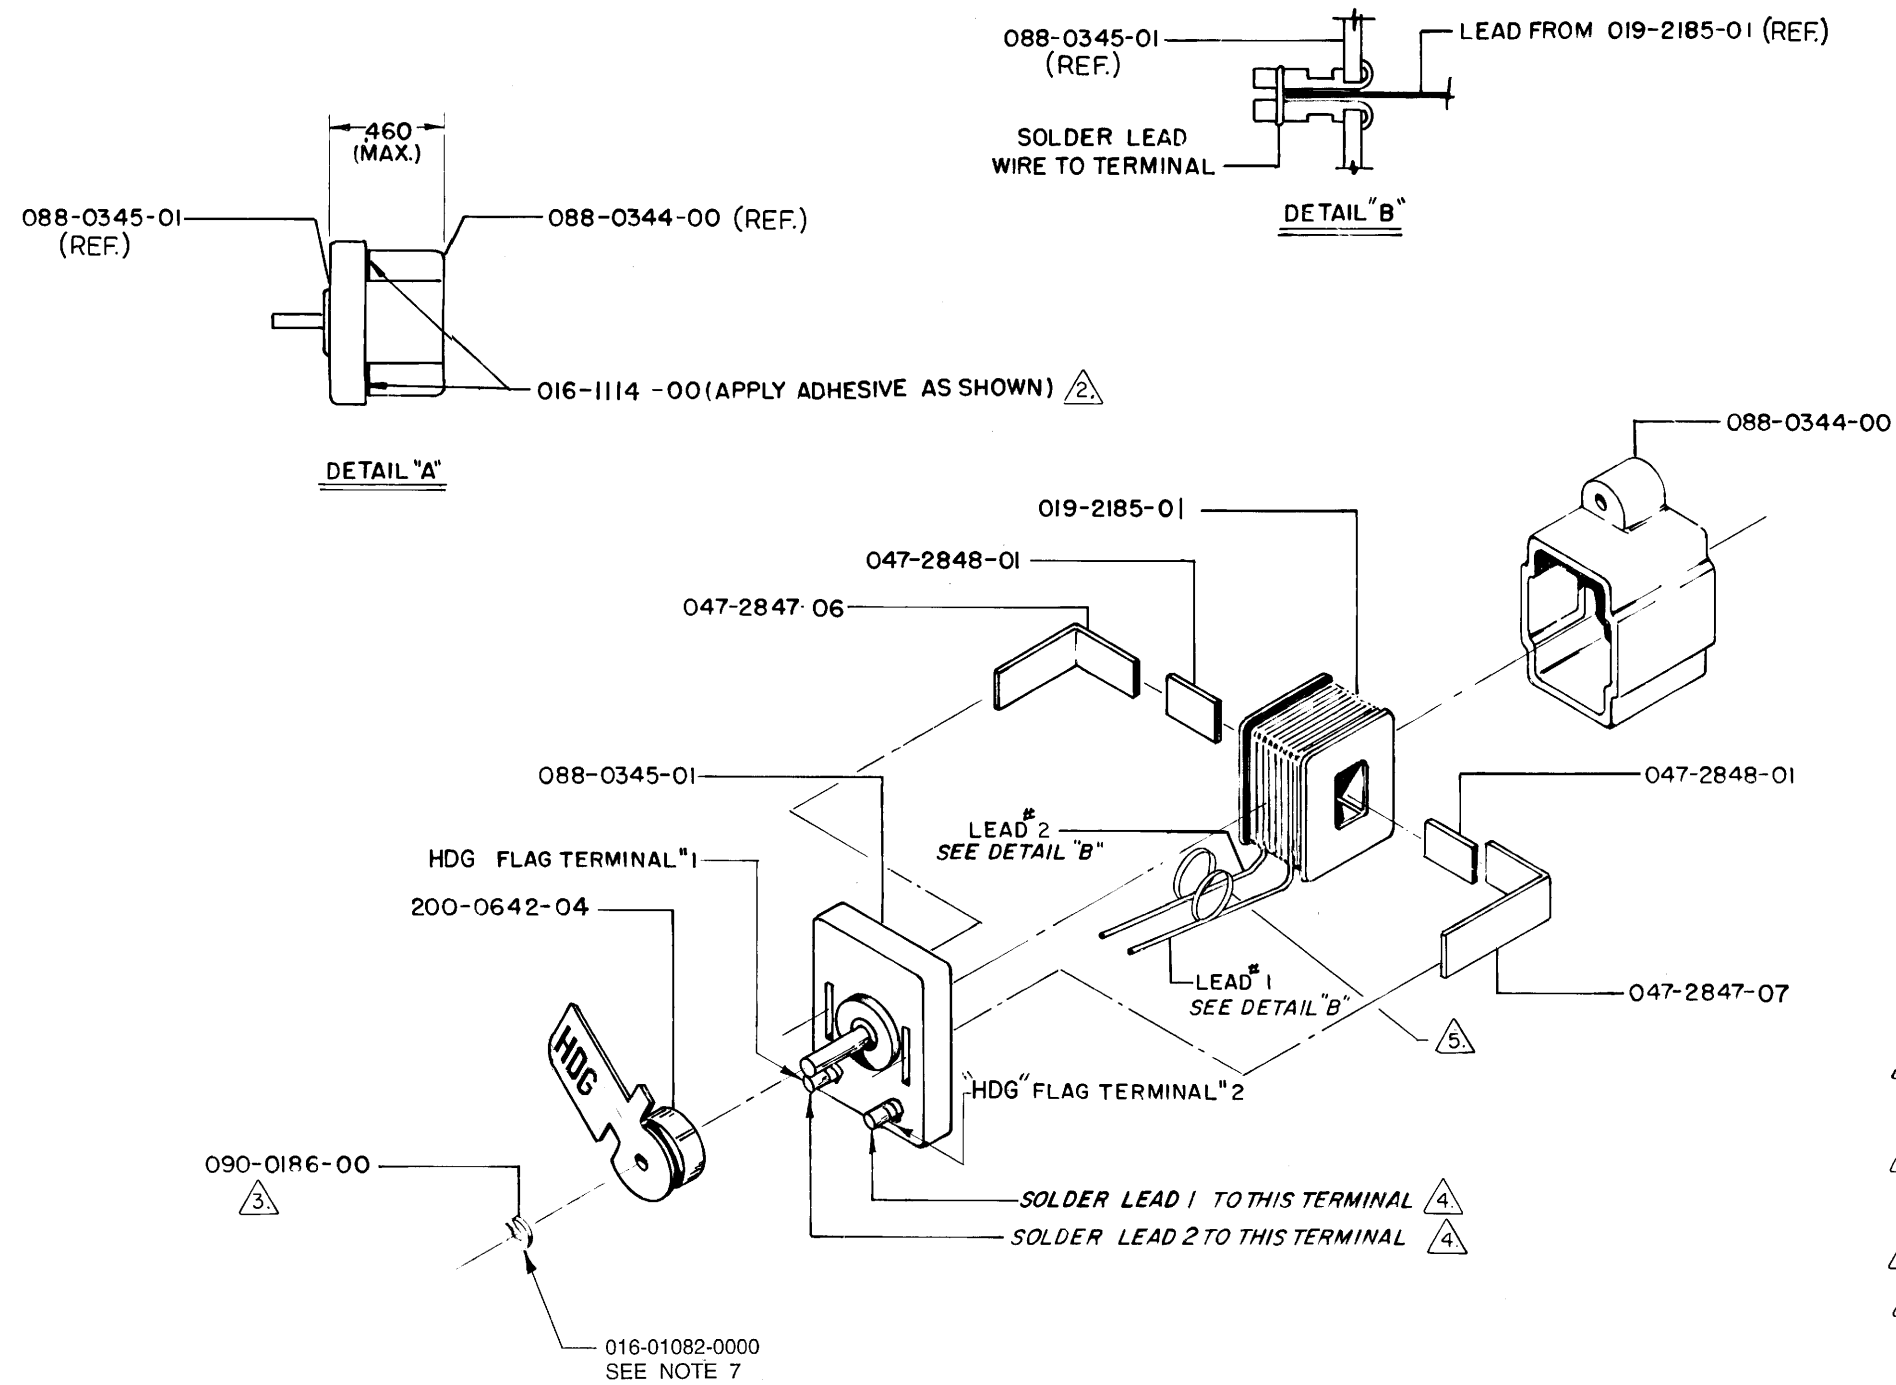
KI 525A FLAG MECHANISM ASSEMBLY
